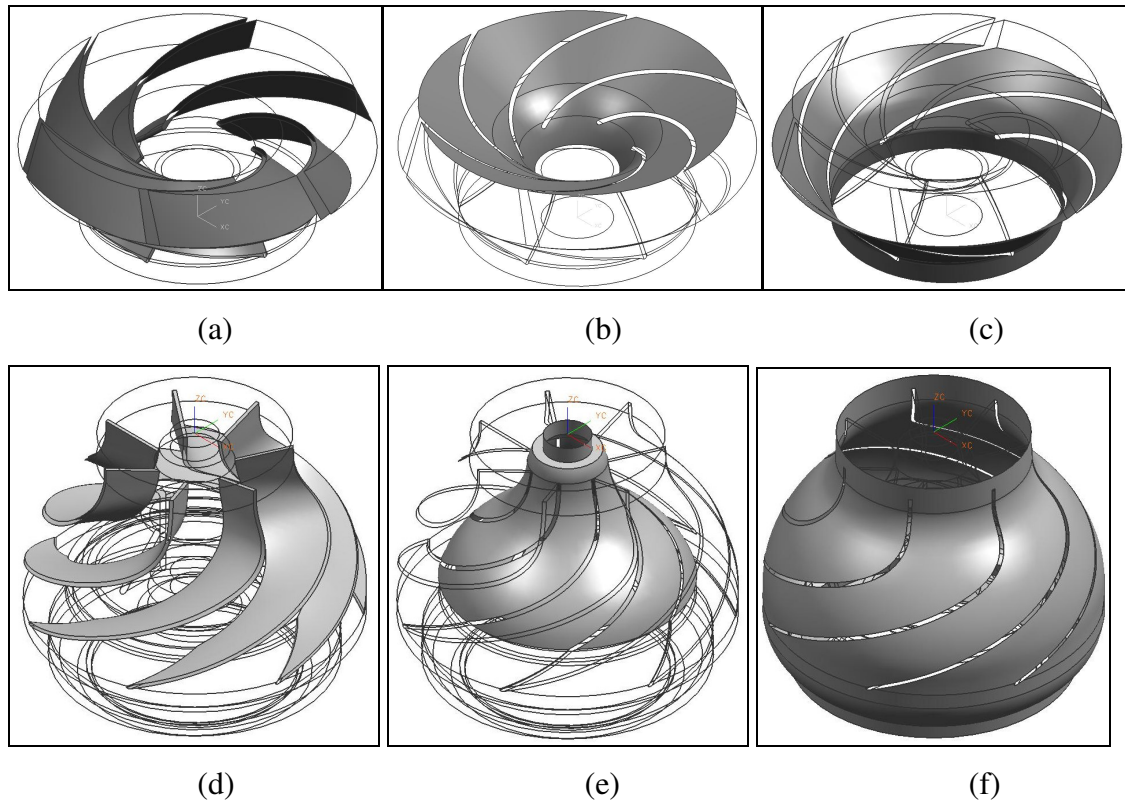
The wall boundaries specified for the problem. a) The impeller blades, b) impeller hub, c) impeller shroud, d) diffuser blades, e) diffuser hub, e) diffuser shroud.
